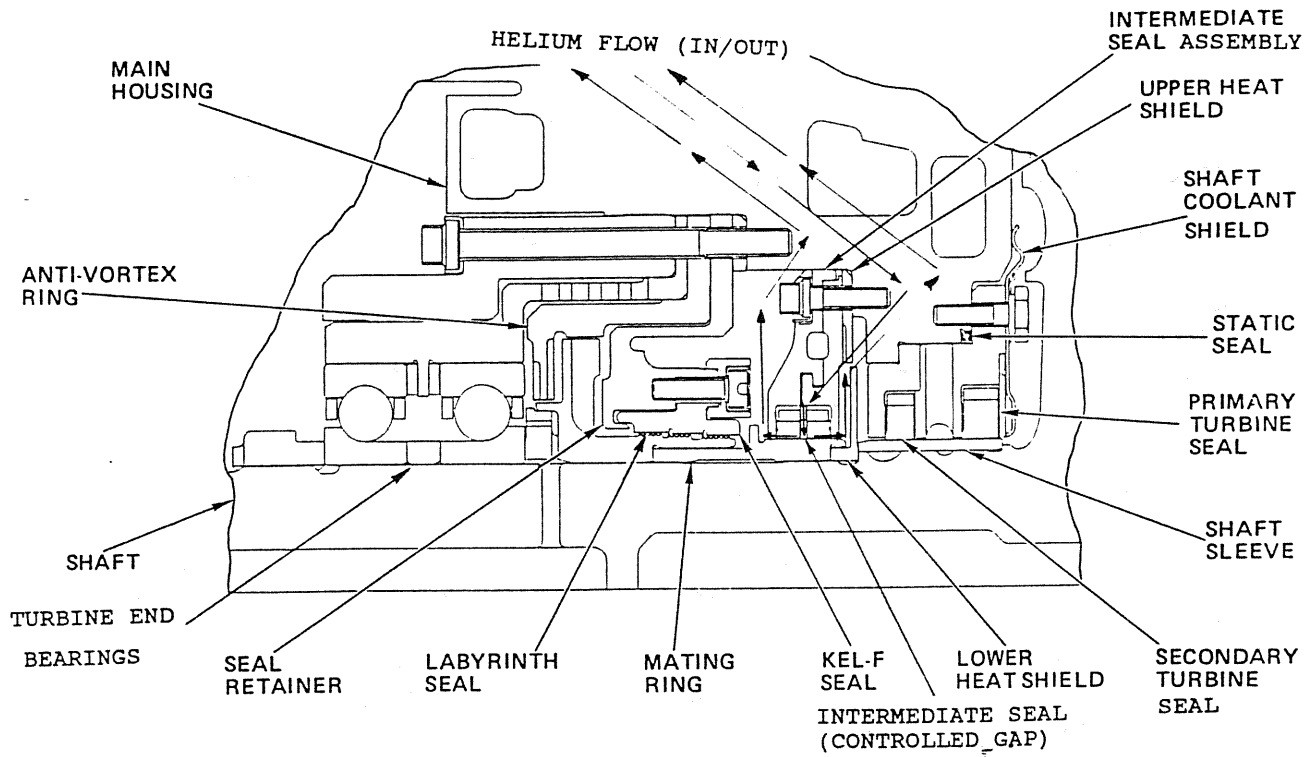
Space shuttle main engine, high-pressure oxidizer turbopump shaft seal package.
